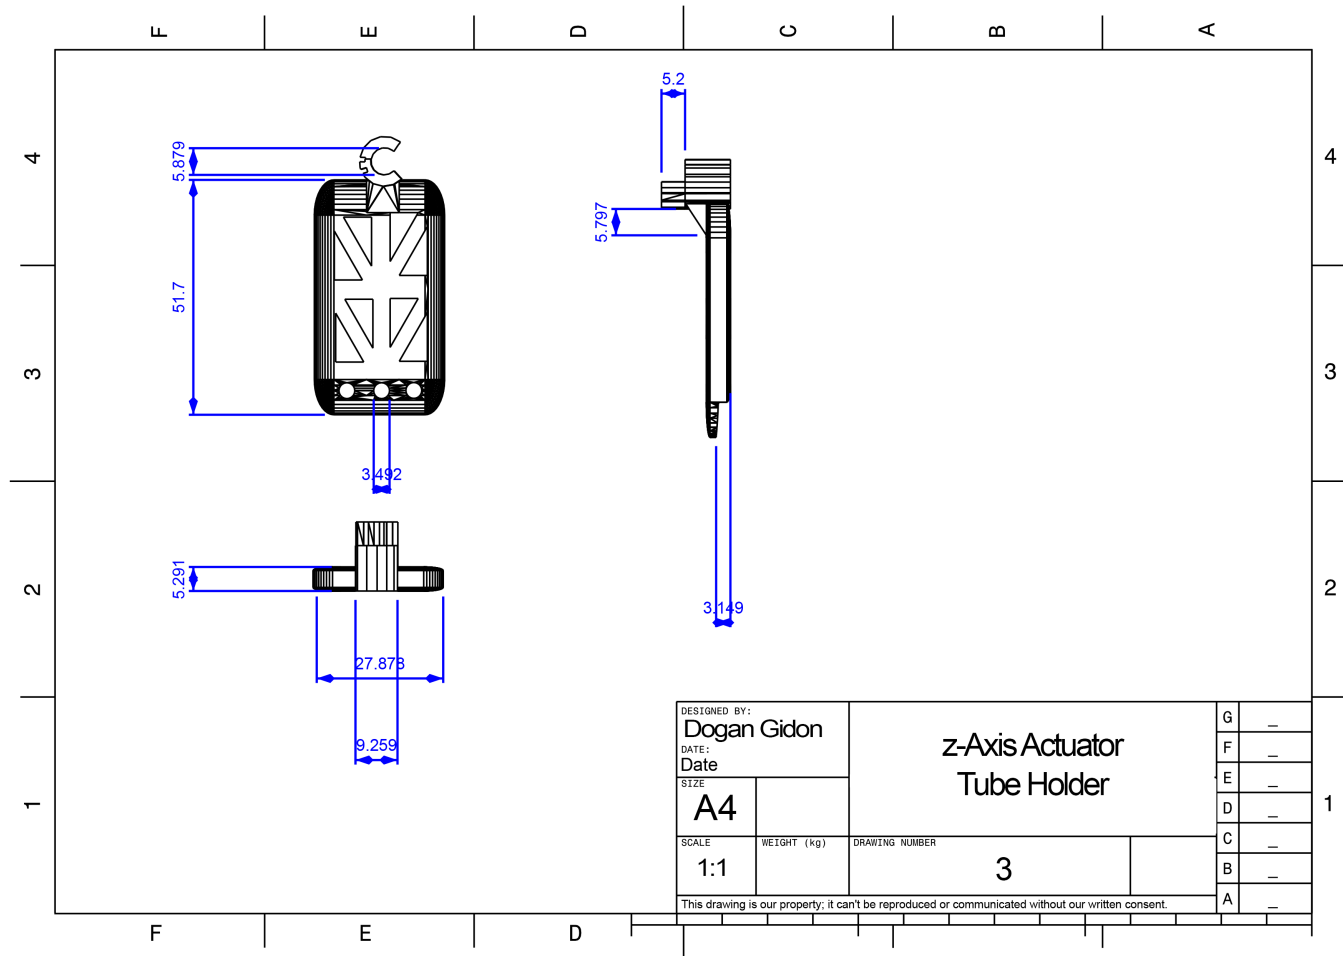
Technical drawing depicting the second part of the z-axis holder assembly. The three holes and connect to the first part of the assembly while the circular end situates the APPJ tube.
